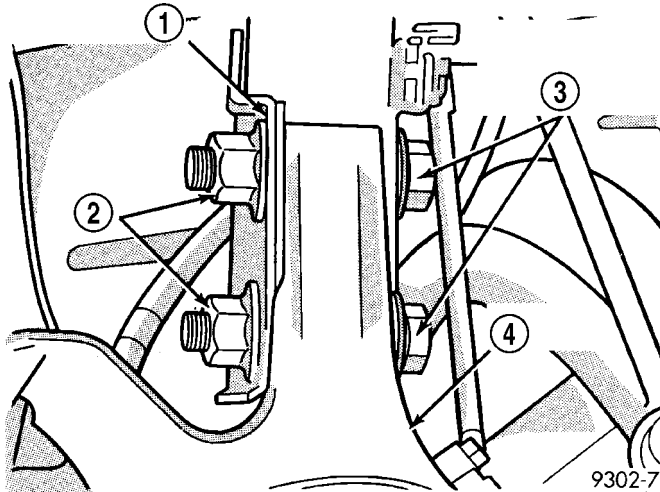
Strut To Steering Knuckle Attaching Bolts
